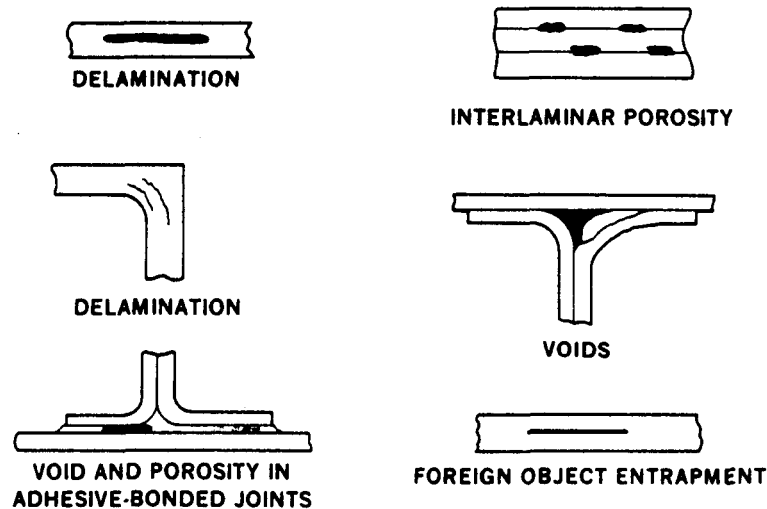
EXAMPLES OF MANUFACTURING DEFECTS
